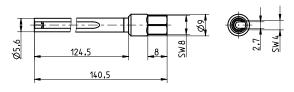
Mounting wrench ø5,6 mm, slotted, Type 1300B14
